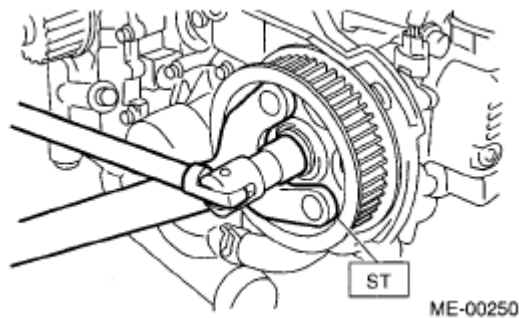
Installing Cam Sprocket No 2 Using Cam Sprocket Wrench ST18231AA010
